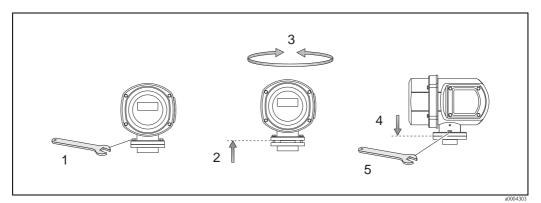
Turning the transmitter housing (stainless steel field housing)
